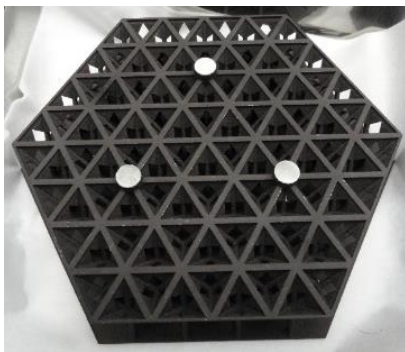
Additively manufactured mirror blank. Courtesy of Ball Aerospace.
